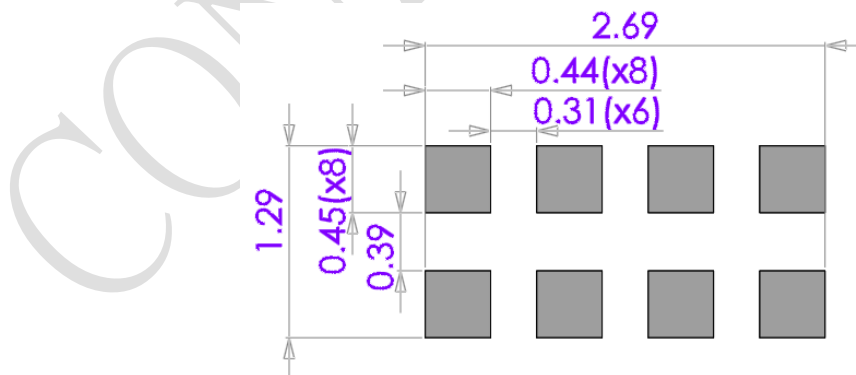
PCB layout for MN58406D (Unit: mm)
